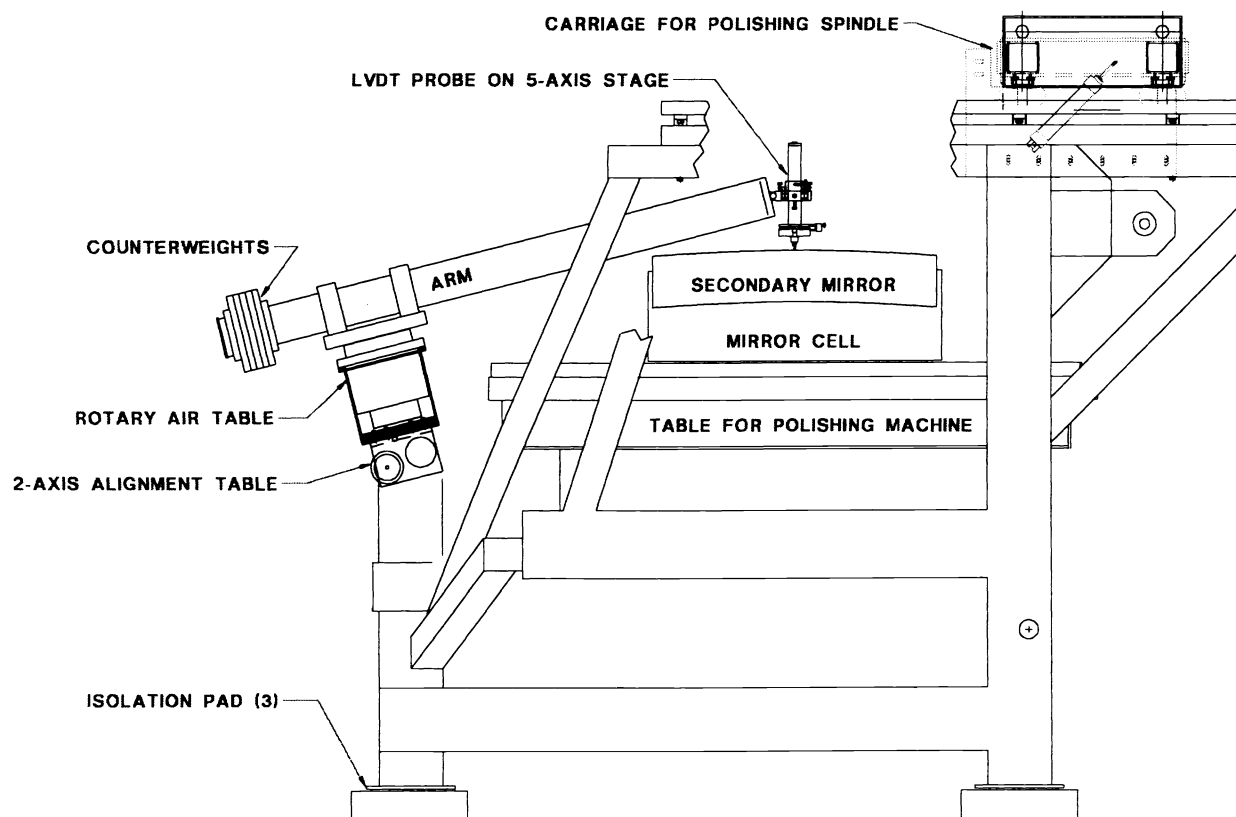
Layout of swing arm profilometer mounted to our 1.8-m stressed-lap polishing machine.
